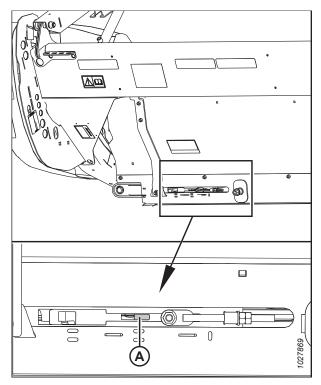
Checking Tension Adjuster – Left Side Shown, Right Side Opposite
